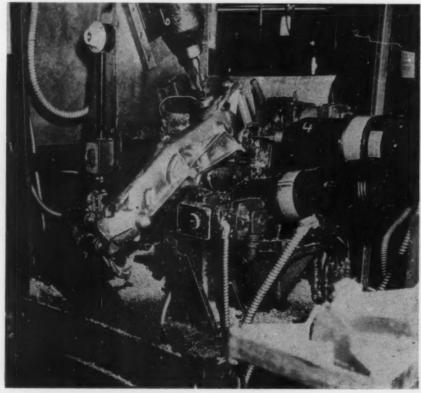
In an Ingersall vertical spindle milling machine portions of the top of aluminum gearcase are faced rapidly by a single cutter having carbide tipped blades.
